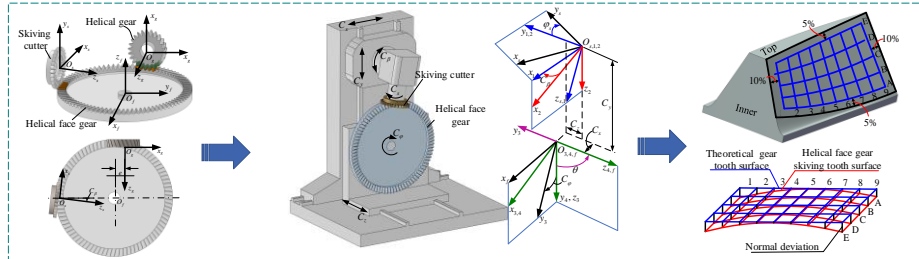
Helical face-gear skiving process with considering the modified cutter profile and the additional machining-axis motion.
